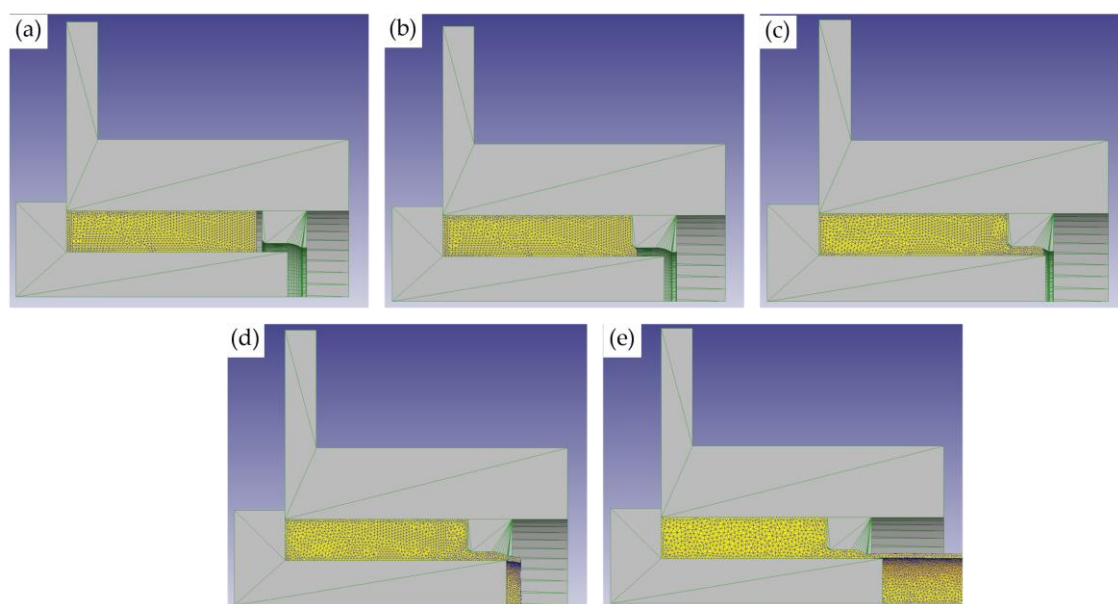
Schematic diagram of the aluminum alloy tube extrusion process: (a) initial stage; (b), (c) upsetting stage; (d) initial extrusion stage; (e) steady-state extrusion stage
